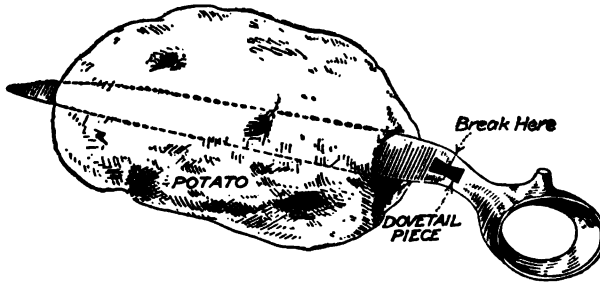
POTATO USED TO KEEP BLADE COOL WHILE BRAZING
